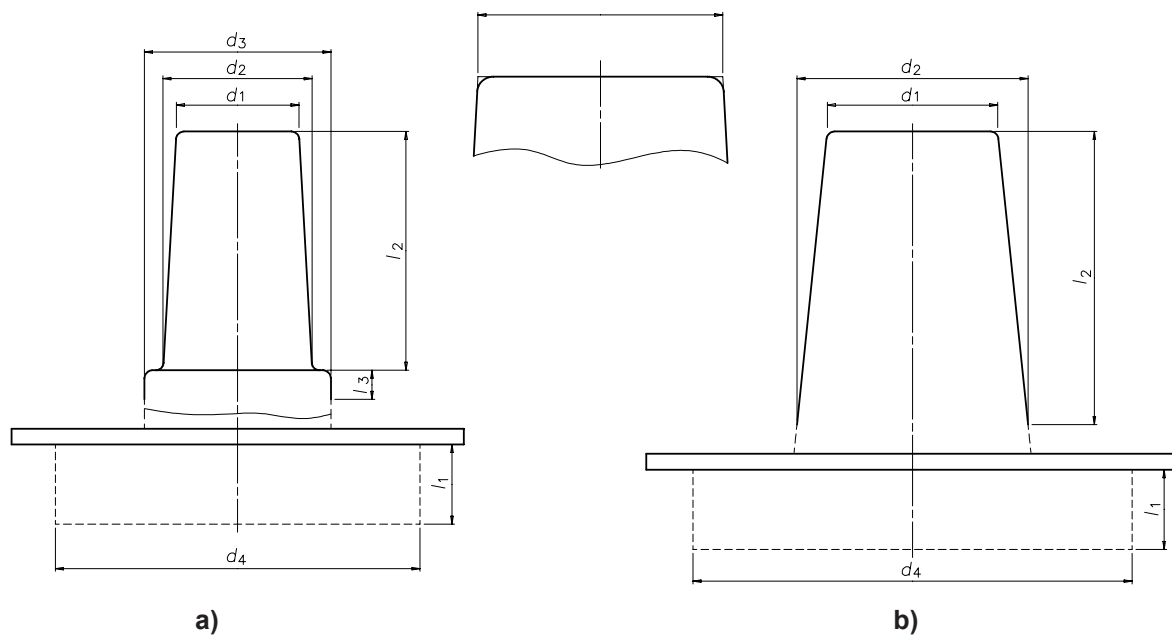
Interface dimensions of outside cone plug-in type bushings
